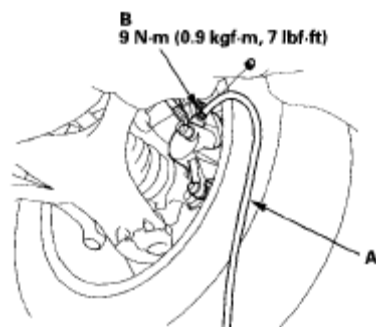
Attaching Clear Drain Tube To Bleed Screw (Front) (With Specifications)
